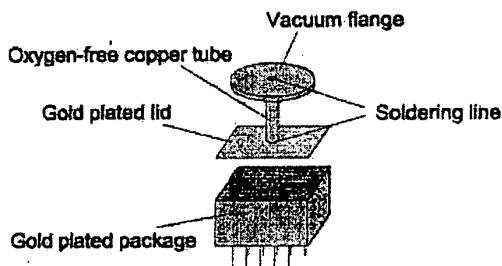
Design of the gyrometer package. The lid is adhesively bonded or laser-welded to the package
